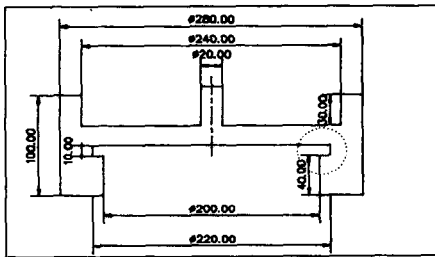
Front view drawing of machined part (Axisymmetric part)
